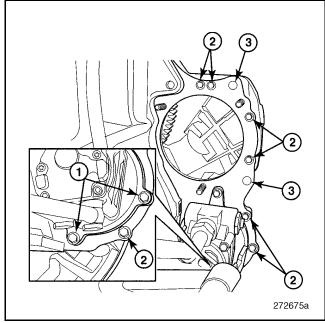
Timing Gear Plate-to-Flywheel Housing Fasteners
